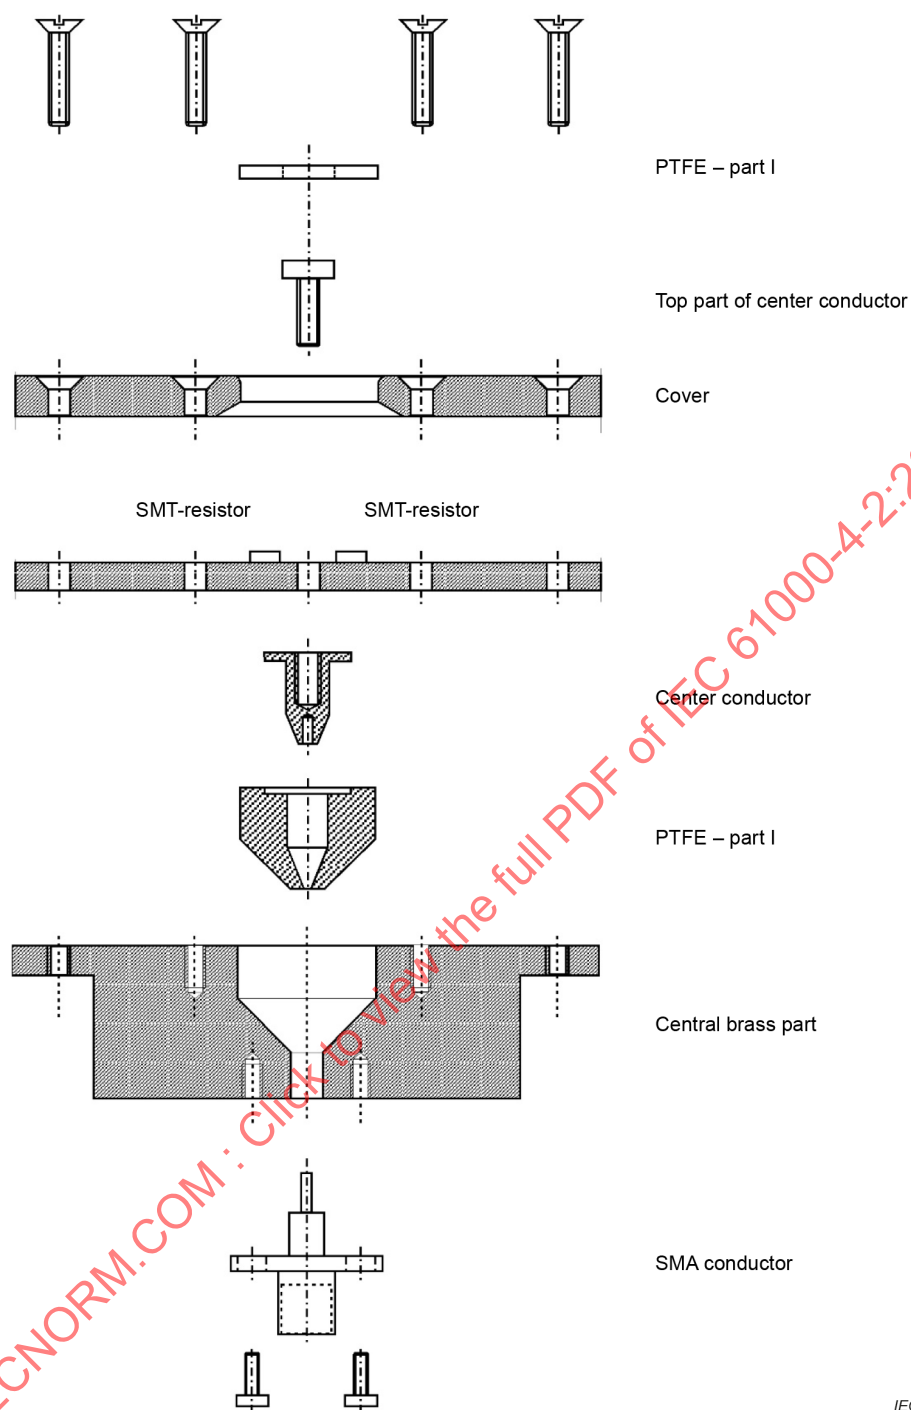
Mechanical drawing of a coaxial target showing the mechanical assembly
